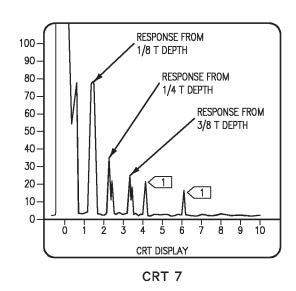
Typical Composite Laminate Inspection (Sheet 3)
